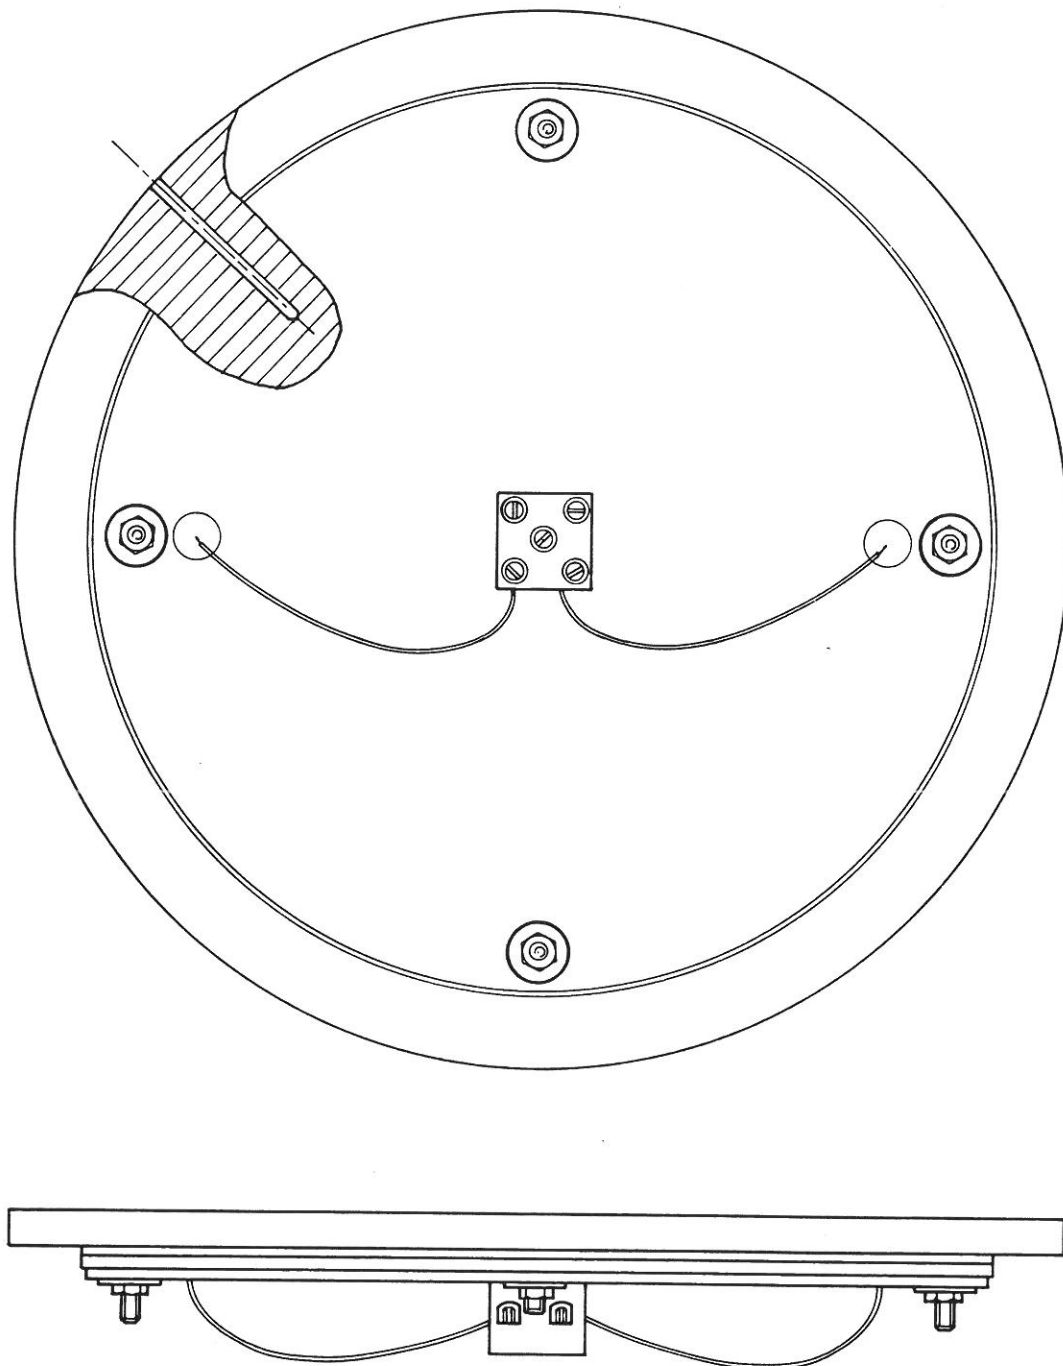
Plate diameter 356.8 mm. It consists of a 8 mm silver-plated copper plate, hot wire 1 mm arranged in a horizontal plane, isolation material 3 mm and a 2.5 mm steel plate. The partial view shows a hole for a thermocouple.
